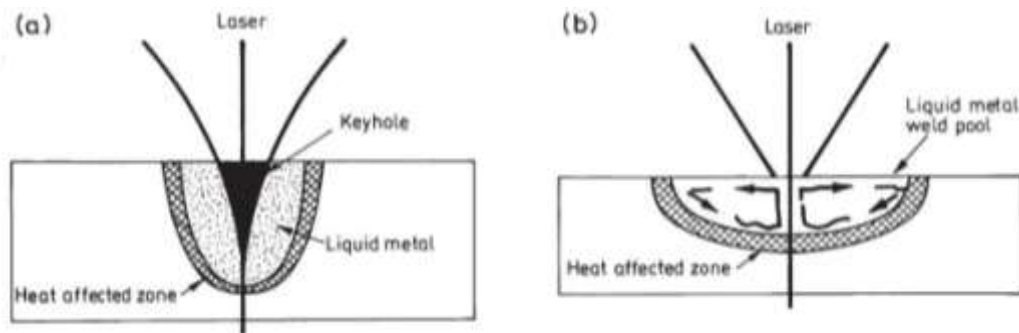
Laser welding modes: a) "keyhole" and b) Conduction [14].
